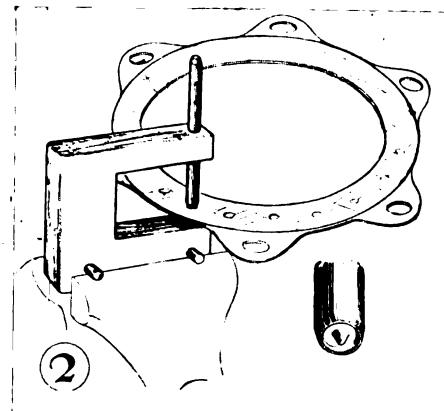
Clutch riveter, which is put in a vise to prevent slipping
